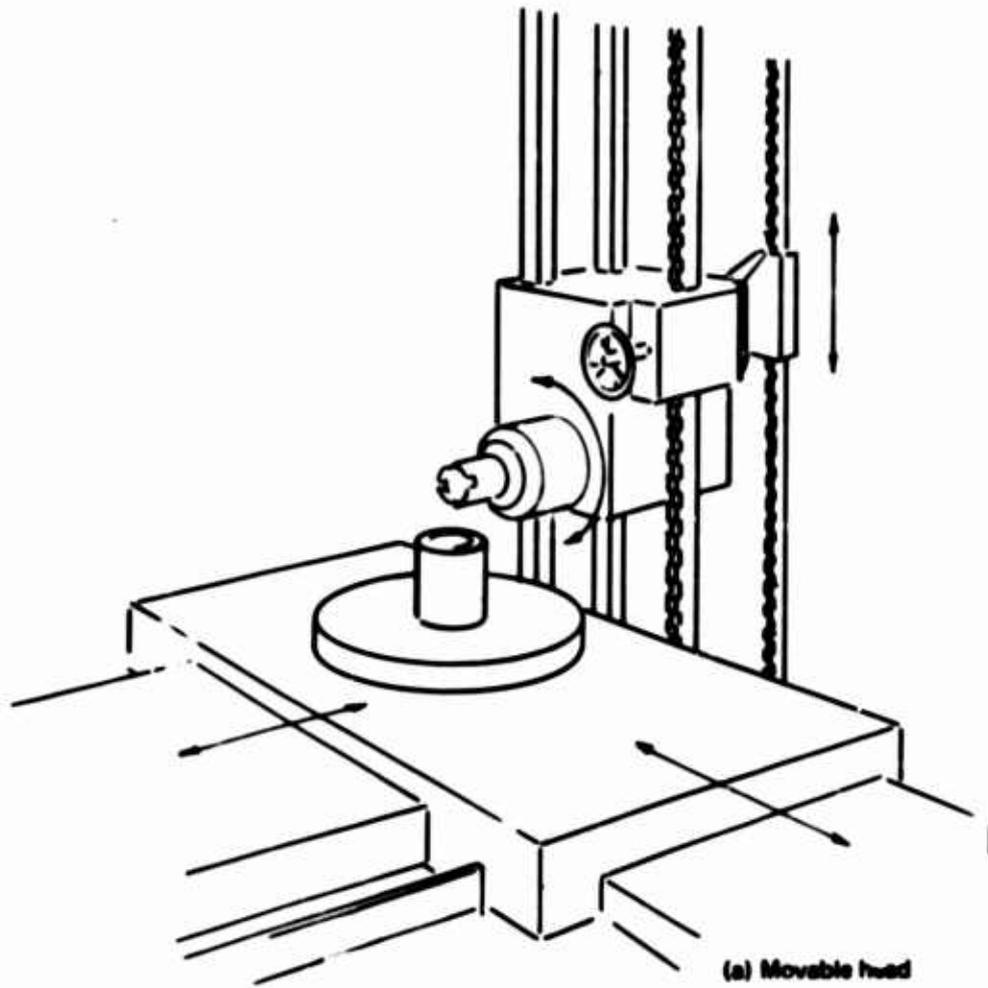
Milling machines—illustrating degrees of freedom in movement similar to those required in seafloor milling machines.
